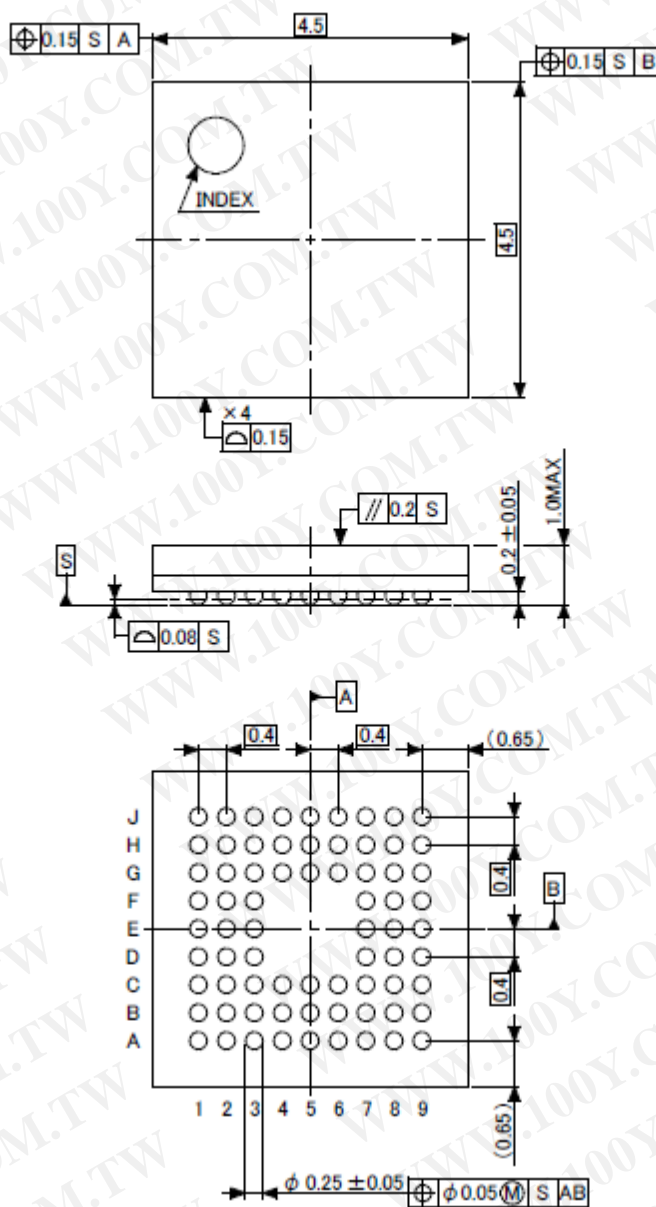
P-VFBGA72-0404-0.40A3 package
